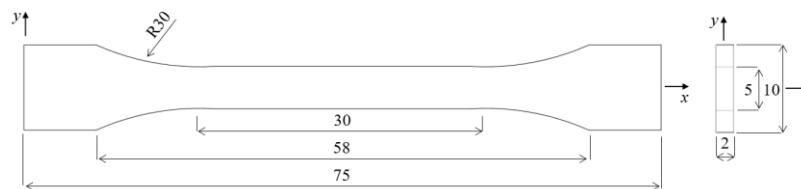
Test specimen for tensile tests (dimensions in mm).
